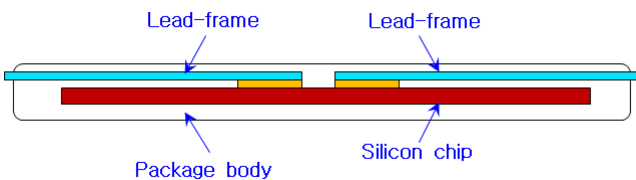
Schematic drawing of a LOC (lead-on-chip) package structure.
